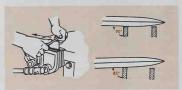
Using a burnisher to turn edge of scraper. (Stanley Tools)
